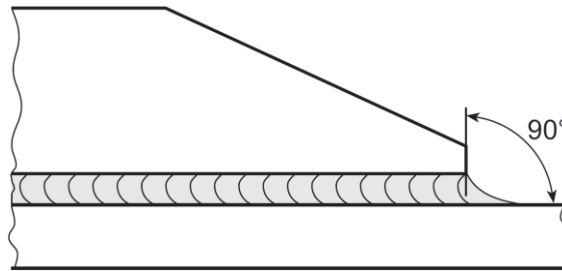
Welding round of stiffening plates or web plates
